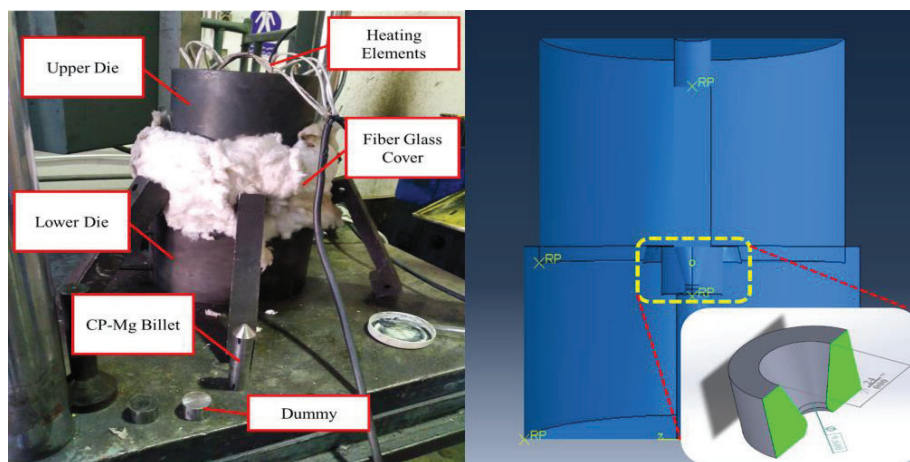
Hot Extrusion Assembly: A) Structure, B) Simulated Structure
